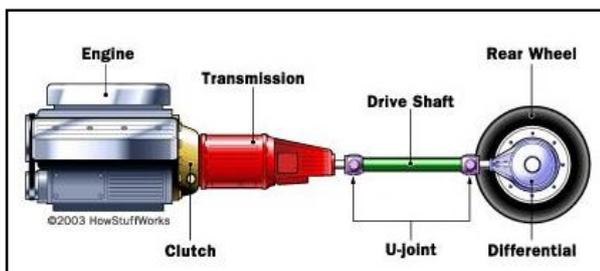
Advanced one piece composite drive shaft for rear wheel drive vehicle
